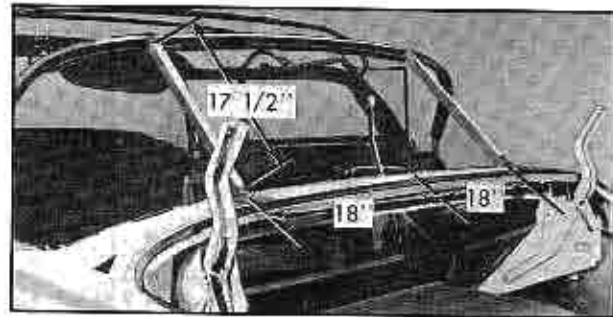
Installing Spacer Sticks on Rear Roof Bow
